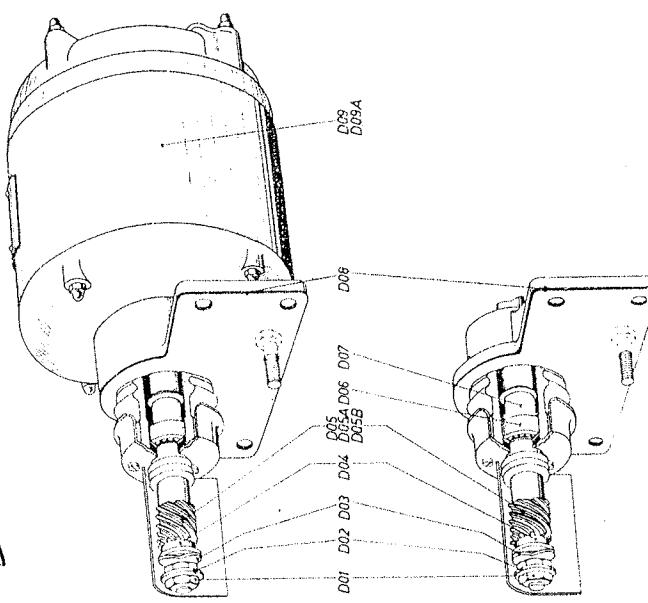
Fig. D - Parts of the flange motor and of the pulley support of the FP 56 and FP 7 projectors
